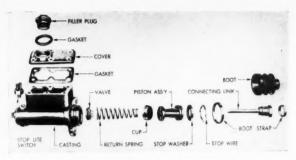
Parts of Combination-Type Hydraulic Master Cylinders
